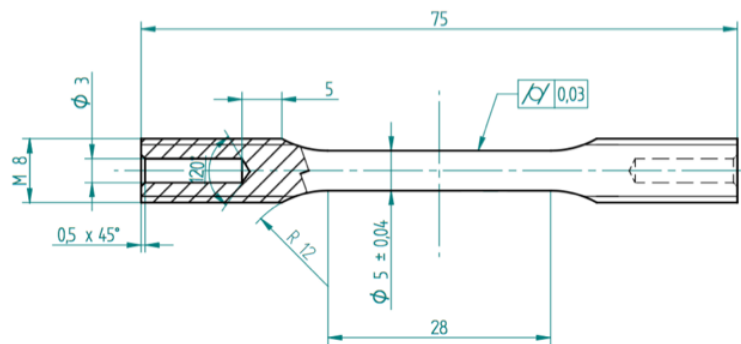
Geometry and dimensions [mm] of tensile specimens.
